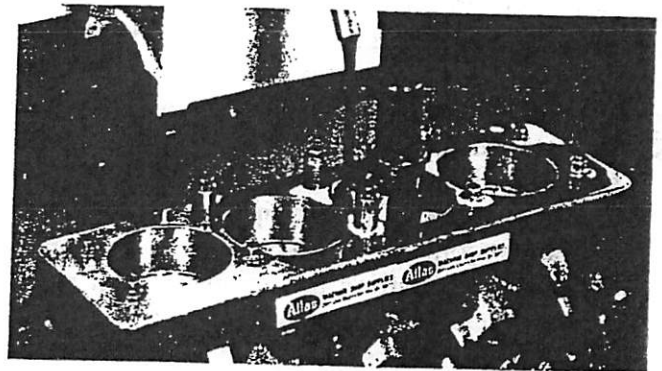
Torquing plates are fastened to the block during cylinder boring to prevent distortion. *Courtesy of Atlas Engineering and Manufacturing, Inc.
